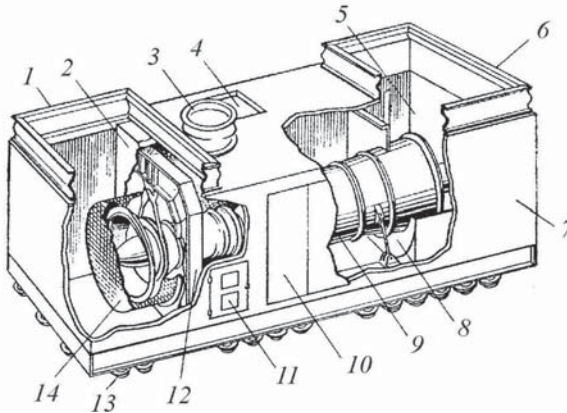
Placing the LM2500 engine in a heat- and sound-insulating container:
